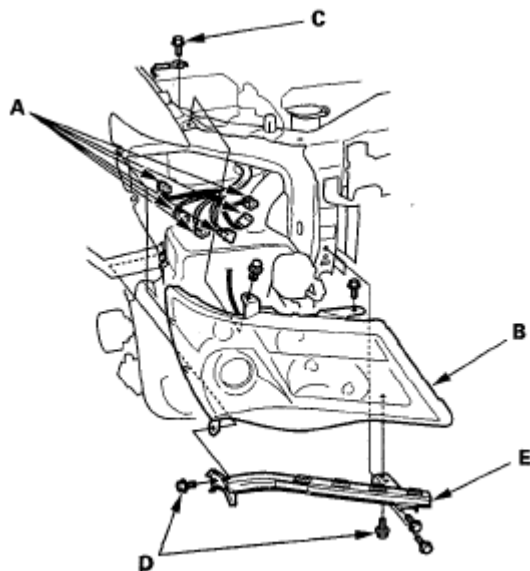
Identifying Connectors, Headlight Assembly, Strap Bolt And Upper Beam
